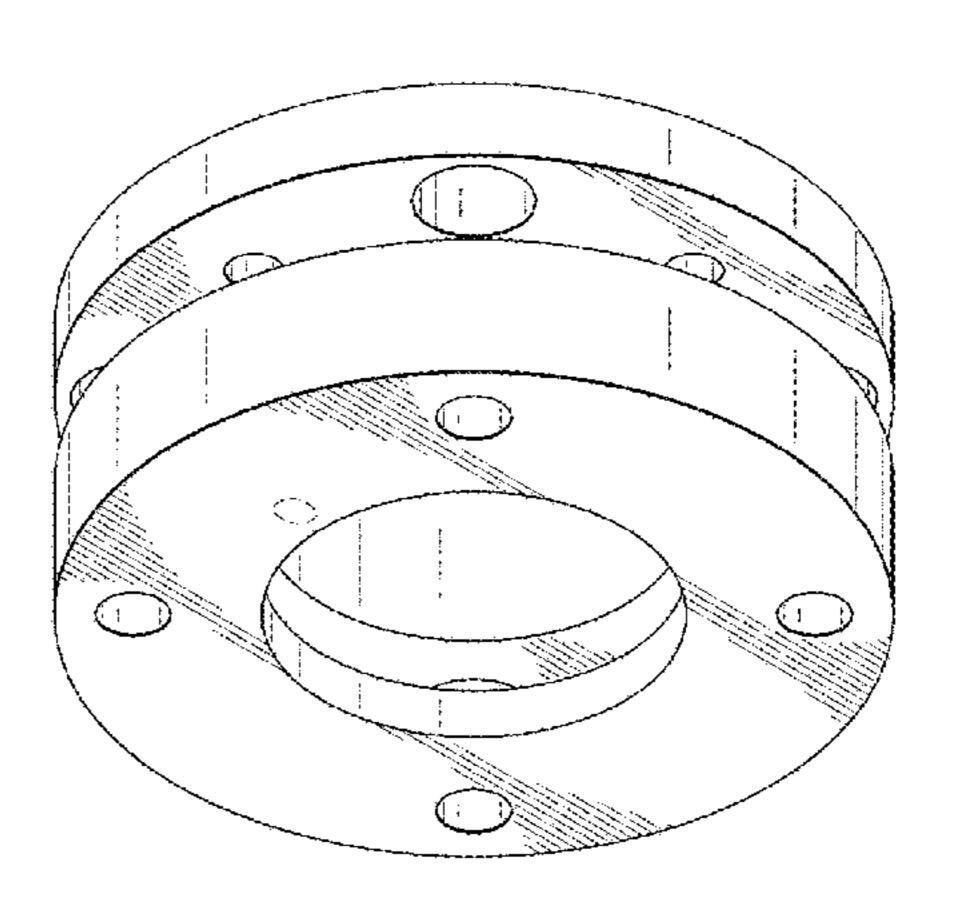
is a bottom perspective view of the alternate embodiment of the present invention; and,
